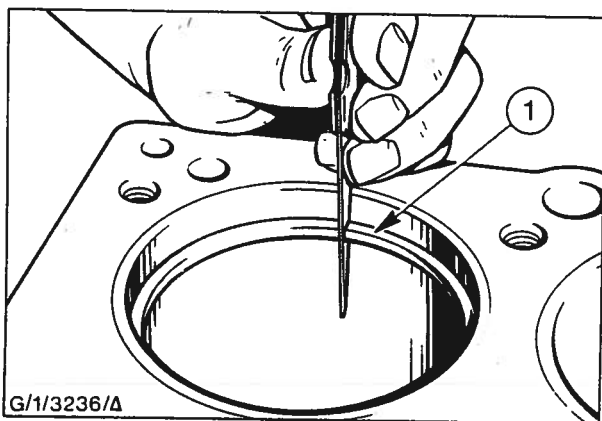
Checking Piston Ring Gap in Cylinder Bore
